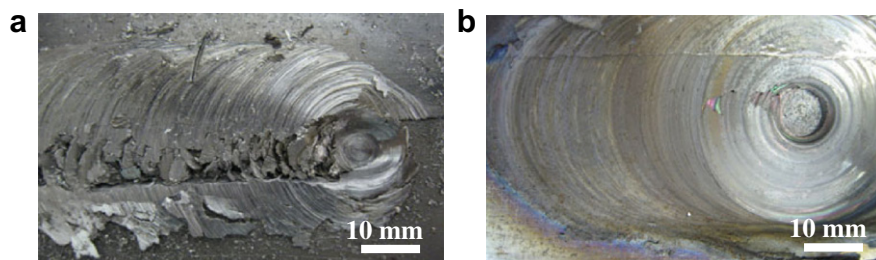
Top views of dissimilar CP-Ti/304 SS lap welding using a fixed tool advancing speed of 25 mm/min and various tool rotating speeds, (a) 560 rpm, (b) 710 rpm.
